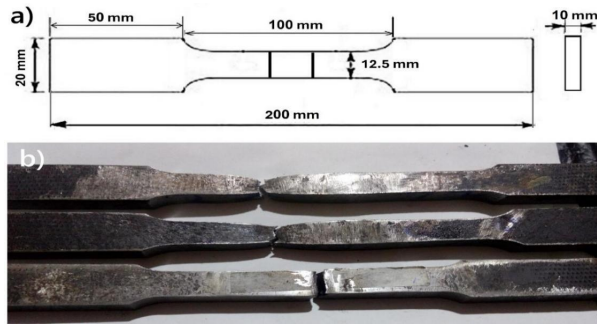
Dimensions of the tensile specimen. (a) A schematic illustration showing the dimensions of the tensile specimen; (b) A photograph of the tensile specimen.
